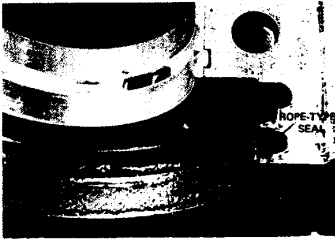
Rope-type rear main seal in place. the crankshaft is removed.
